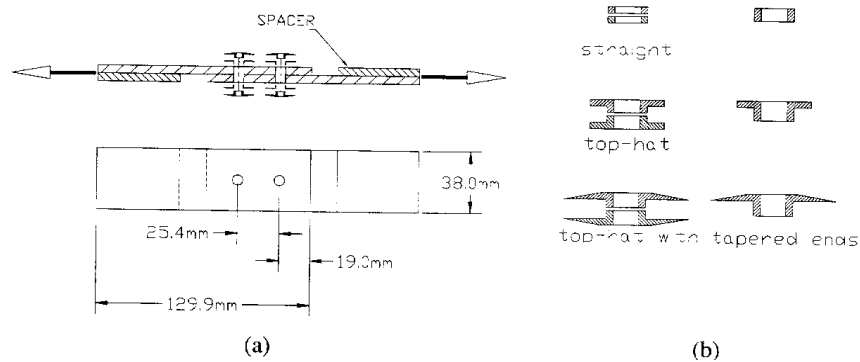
(a) Tandem fastener single lap-joint specimen used in this investigation.
